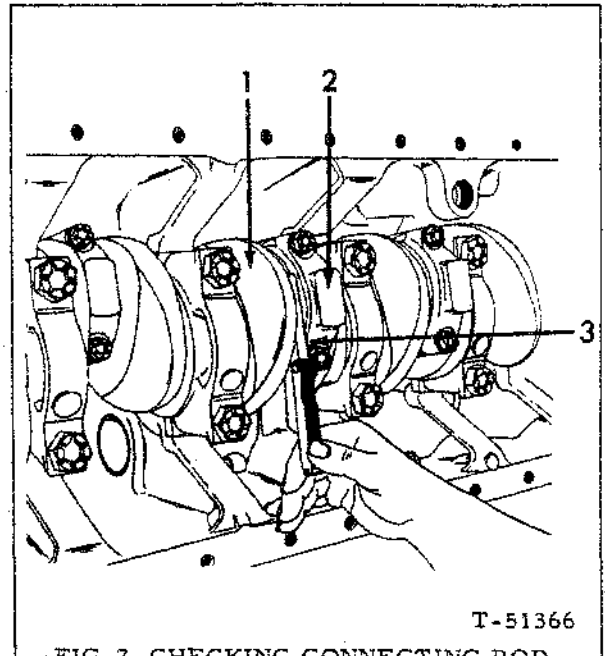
CHECKING CONNECTING ROD SIDE CLEARANCE
